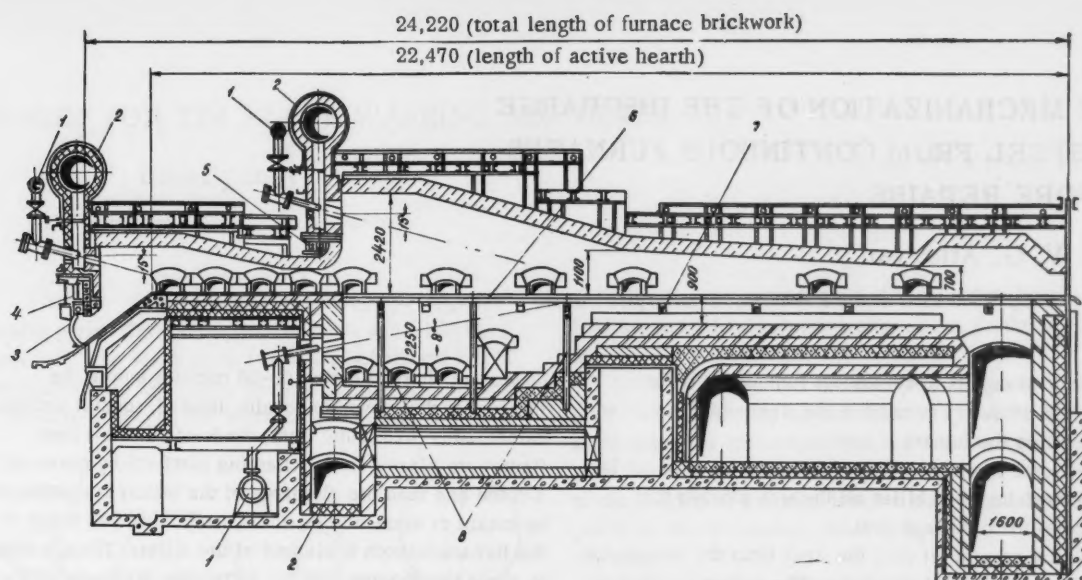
Three-zone continuous furnace of the 2250 mill after the modernization: 1) gas header; 2) hot air header; 3) water-cooled beam at the discharge end; 4) suspension beam for doors; 5) supporting beam for hot air header; 6) longitudinal beam skids; 7) transverse supporting beams; 8) II-shaped supporting beams.
